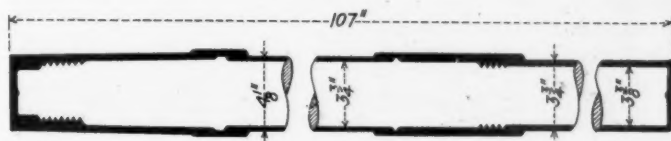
SECTION SHOWING METAL REMOVED (IN BLACK) FROM ROUGH FORGING.
